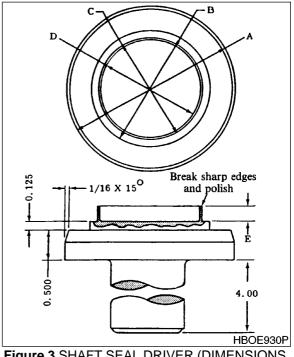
SHAFT SEAL DRIVER (DIMENSIONS ARE IN INCHES.)
